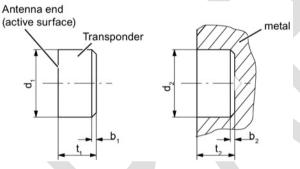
Flush-mounting of MDS D421/D521/E623 in metal with tools
